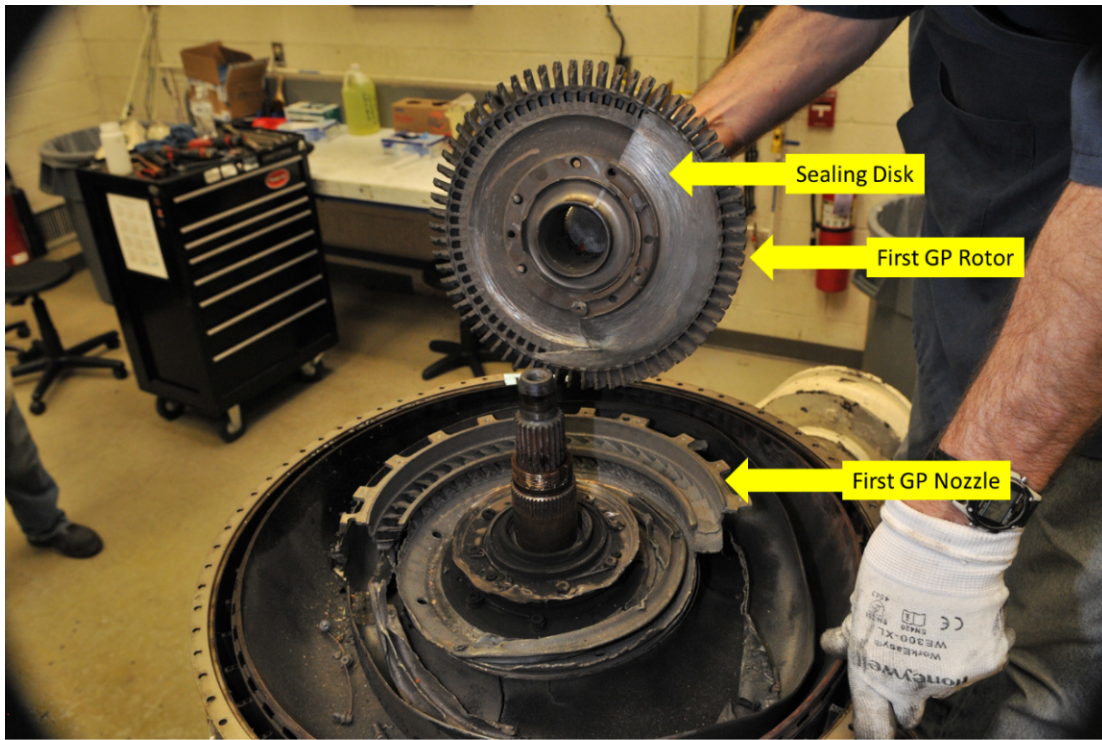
Engine showing first stage gas producer (GP) turbine rotor with sealing disk fragment attached.
